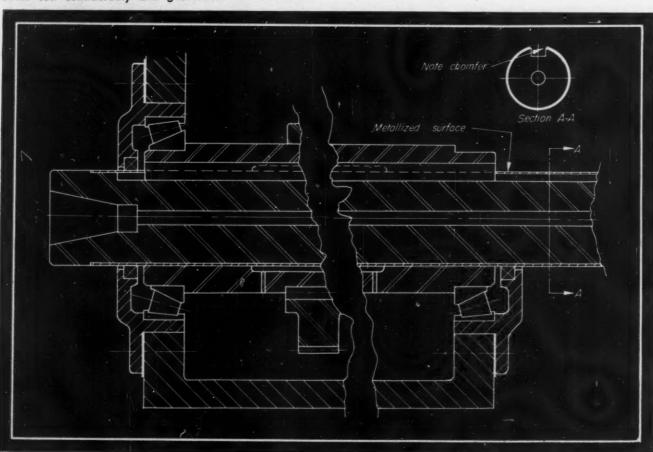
Sliding boring shaft, metallized with bronze, reduces cost considerably and guarantees self lubrication
